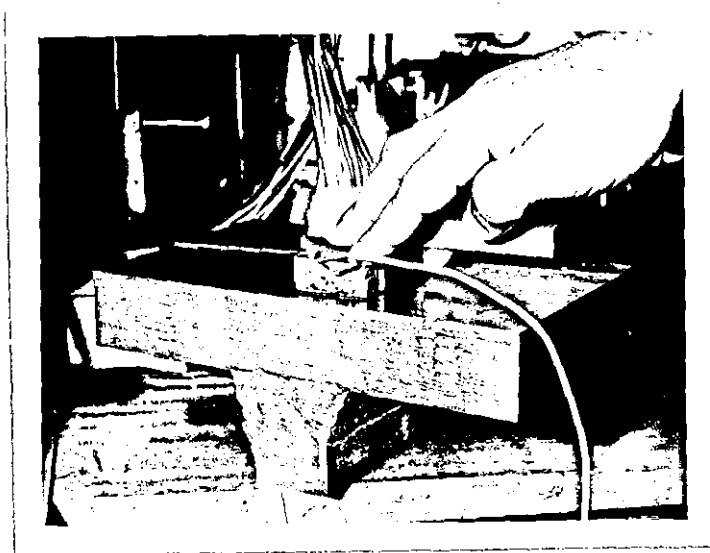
CRACKS FOUND IN A T-WELD
